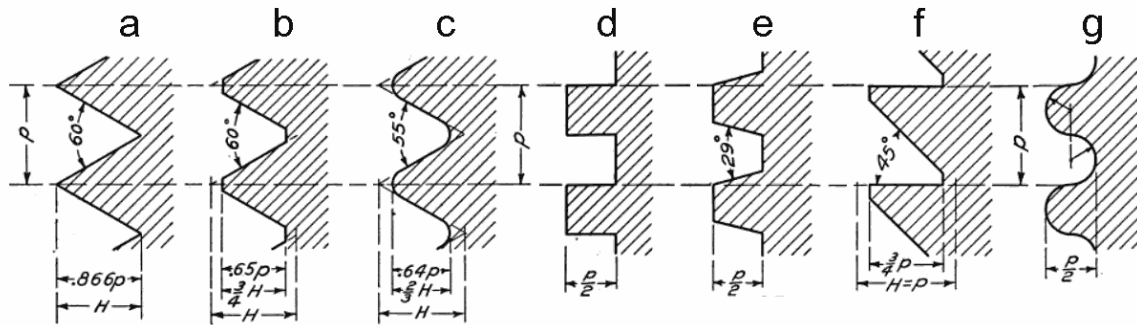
Early Thread Systems (a) V-thread (b) American National Thread (c) Whitworth thread (d) Square thread (e) ACME thread (f) Buttress thread (g) Knuckle thread
